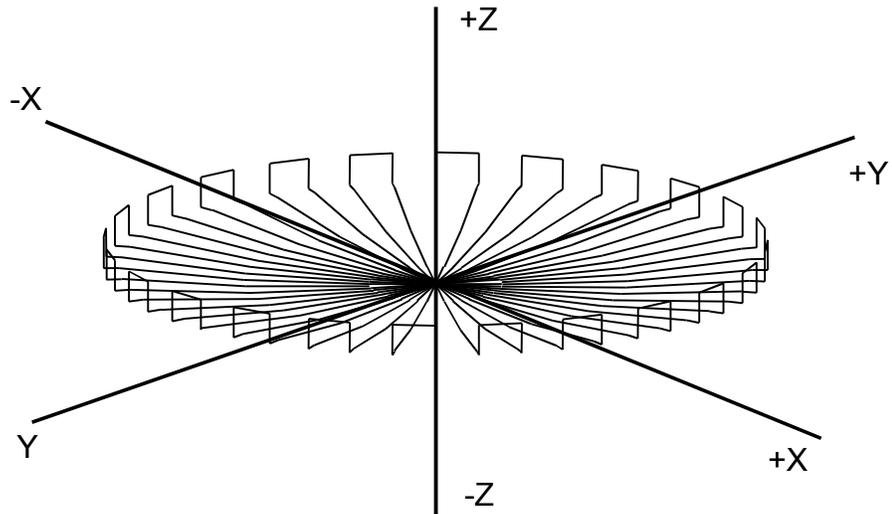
, Layout for Sample Program #9, Mold Rotation
